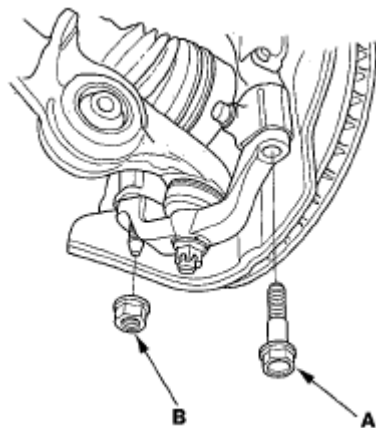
Identifying Knuckle Holder Bolt And Nut
